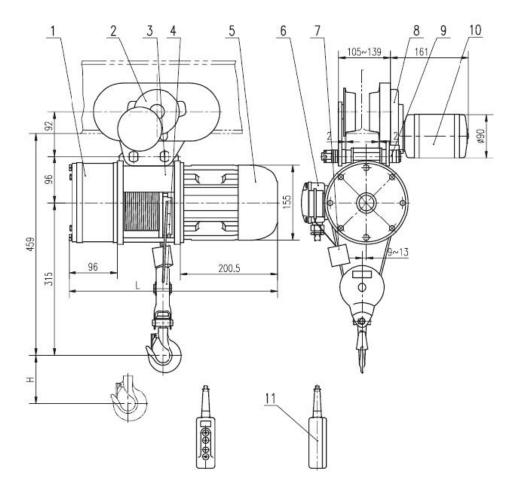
Outline Structure Drawing for PWMD 0.25T Electric hoist
